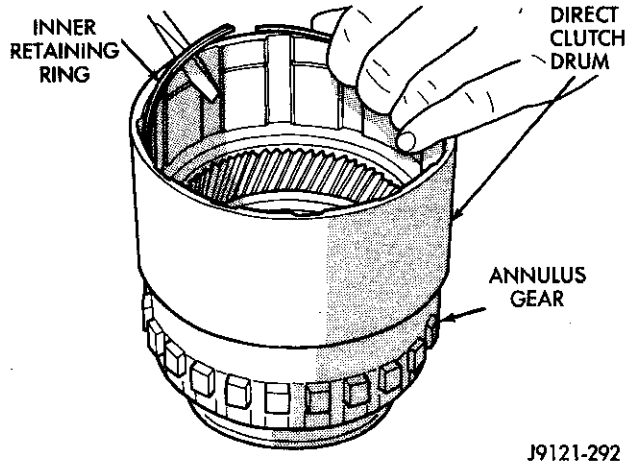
Clutch Drum Inner Retaining Ring Removal
